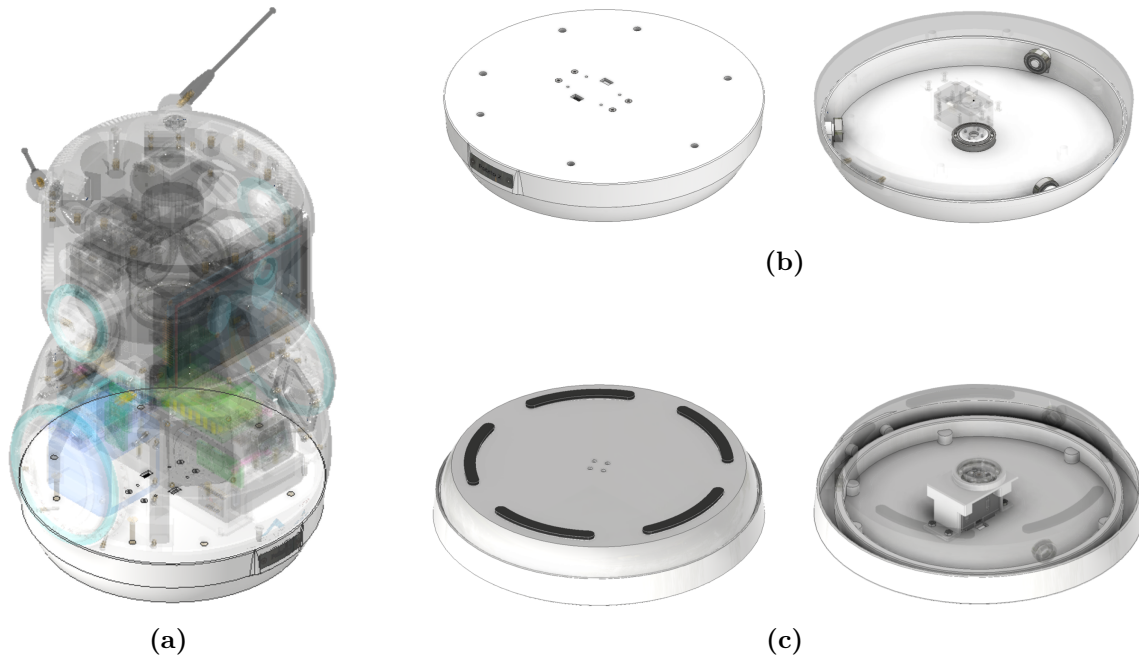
Robot base sub-assembly: (a) Location in the main assembly, (b) Top view detail, (c) Bottom view detail.
